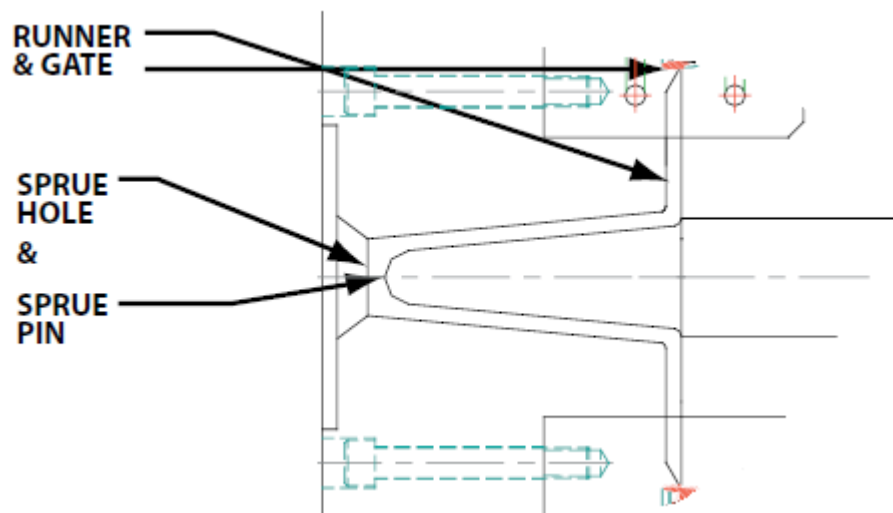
Passage connecting the nozzle to the die cavity of a hot chamber machine [23].
